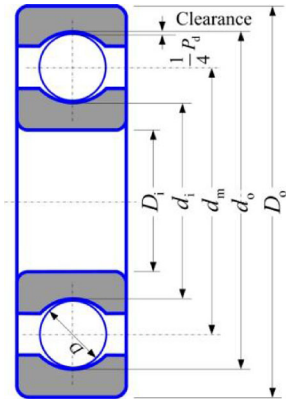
Geometrical characteristics of the deep groove ball bearing.
